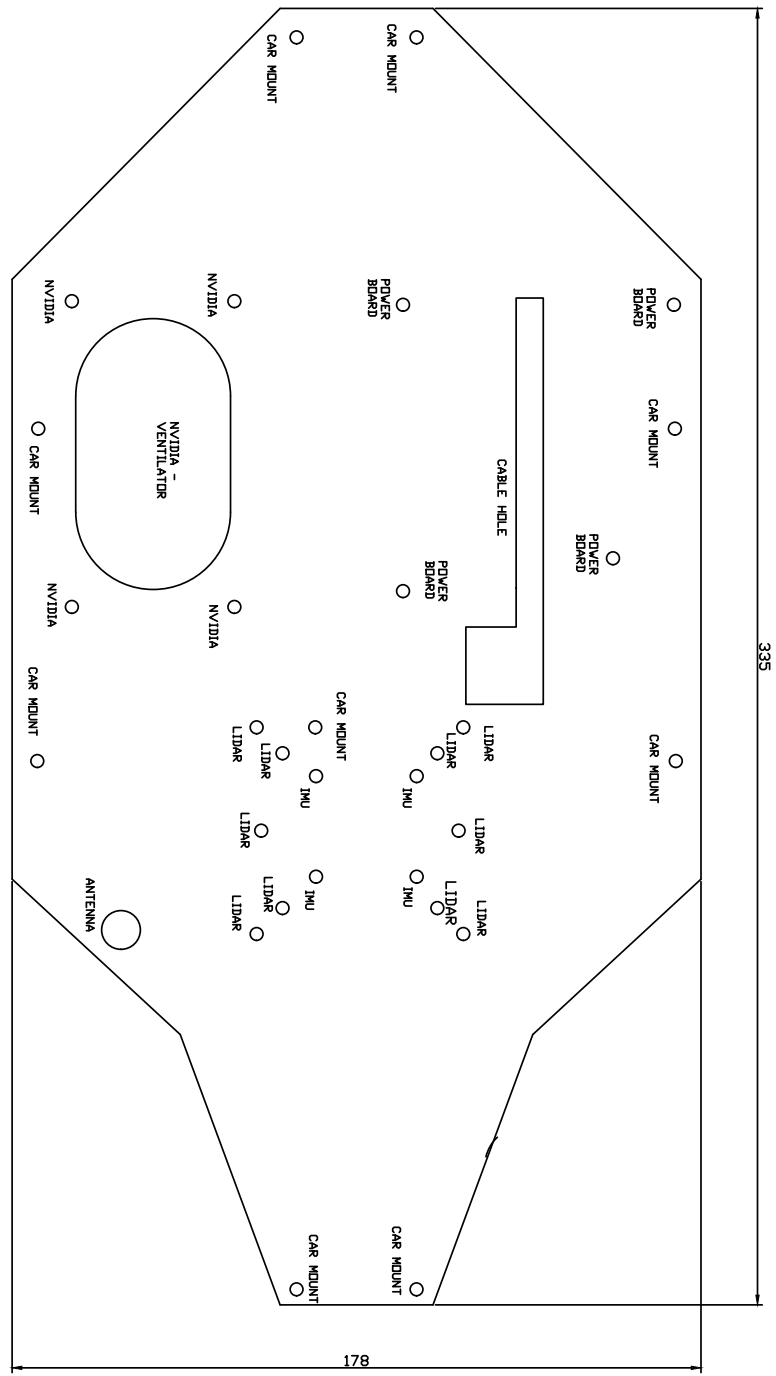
Board design for the bigger car model.(dimensions in mm)
